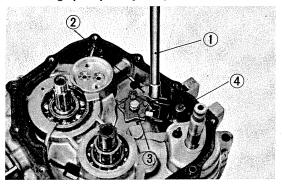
① 6 mm, T-handle box wrench ② Gear shift drum stopper ③ Gear shift cam ④ Gear shift spindle
